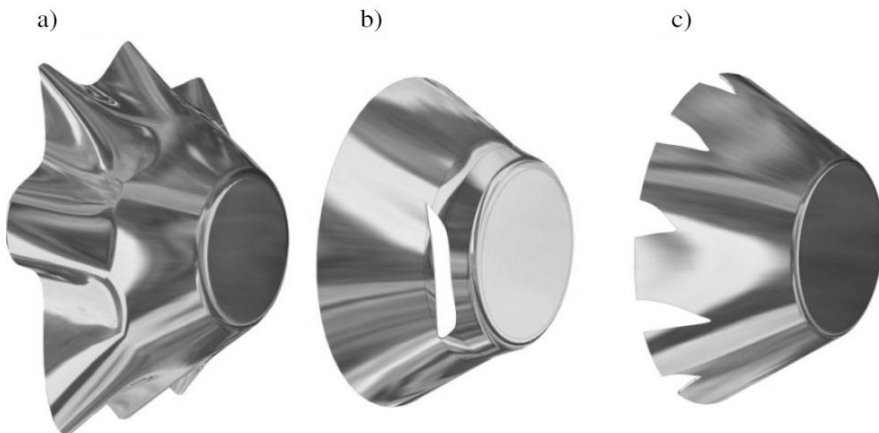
Types of defects during spinning: a) folding, b) circumferential cracks, c) radial cracks [3]
